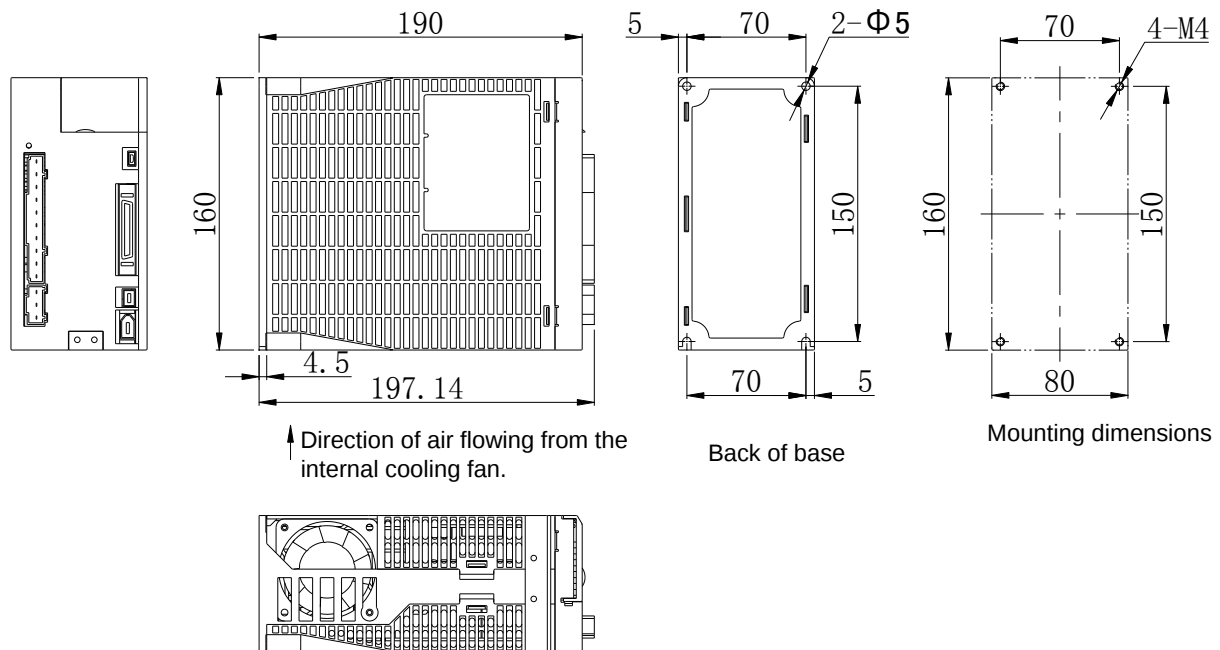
Outline dimensional drawing of WSDV-110 and WSDV-140
